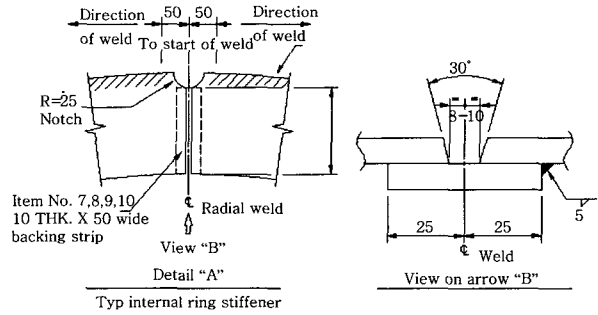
Shape of weld joint for stiffener¹⁷⁾
